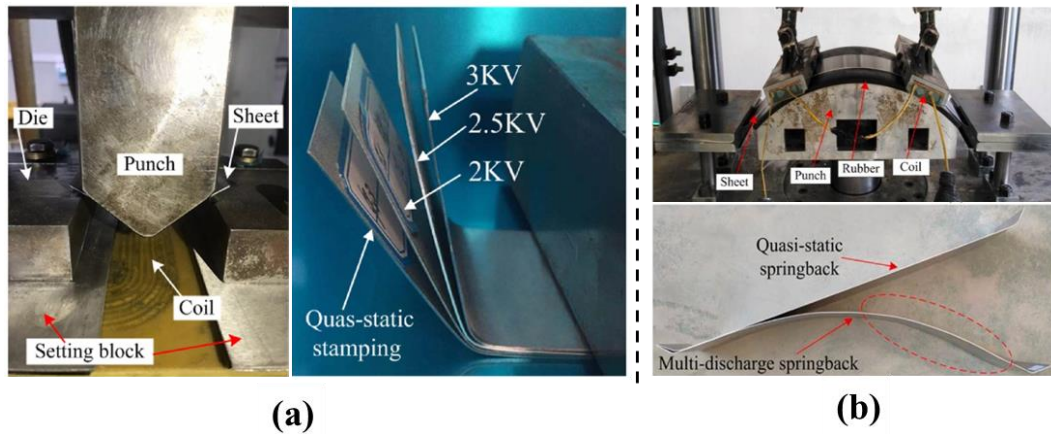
Calibration and springback control of the workpiece through electromagnetic-forming technologies: (a) incremental forming of AA3003-H14 aluminum alloy sheet [243], (b) inverse bending of 5052-O aluminum alloy sheet [244].
